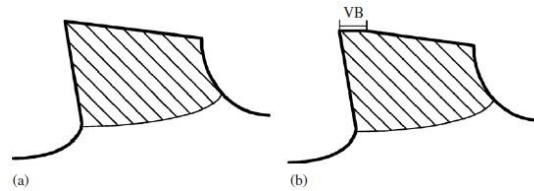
Definition of flank wear of broaching tool: (a) fresh tool, (b) worn tool (Shi & Gindy, 2007)
